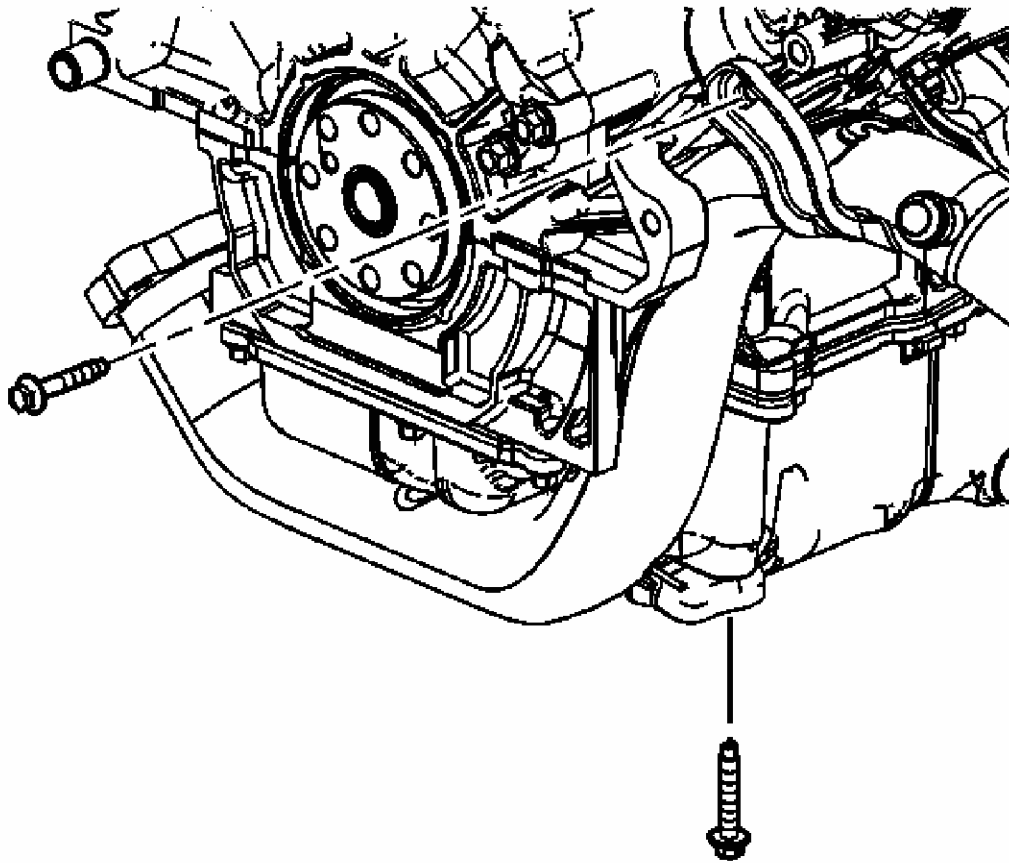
View Of Exhaust Intermediate Pipe Bolts
